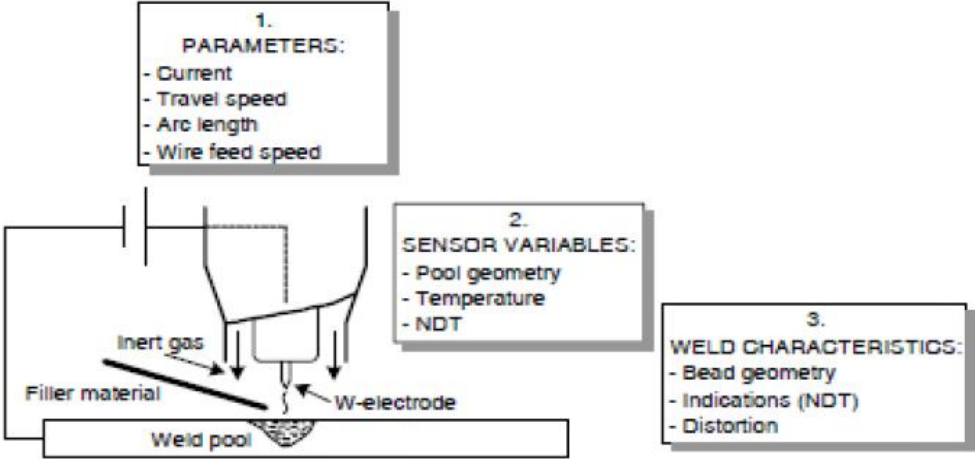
TIG welding process with its parameters [38].
